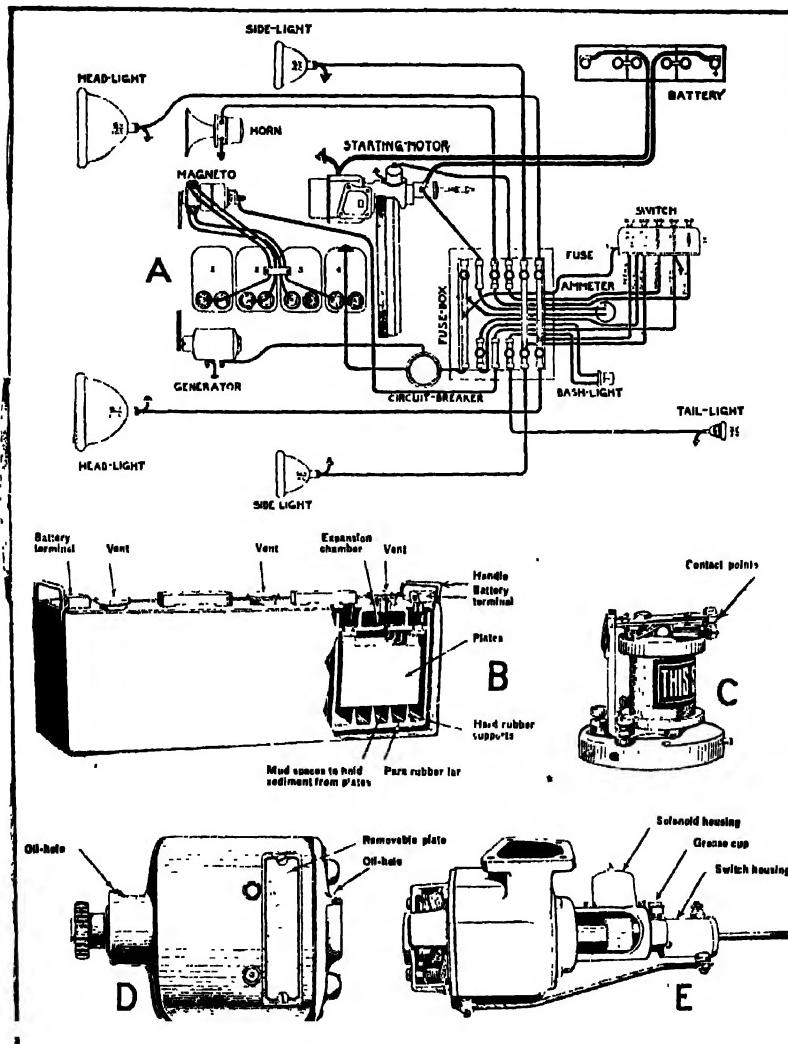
Complete Wiring Diagram of Starting and Lighting System Used on 1915 Overland Automobiles at A, Part, Sectional View of Storage Battery at B, Design of Circuit Breaker Shown at C, External View of Generator at D, and Starting Motor Construction at E.
